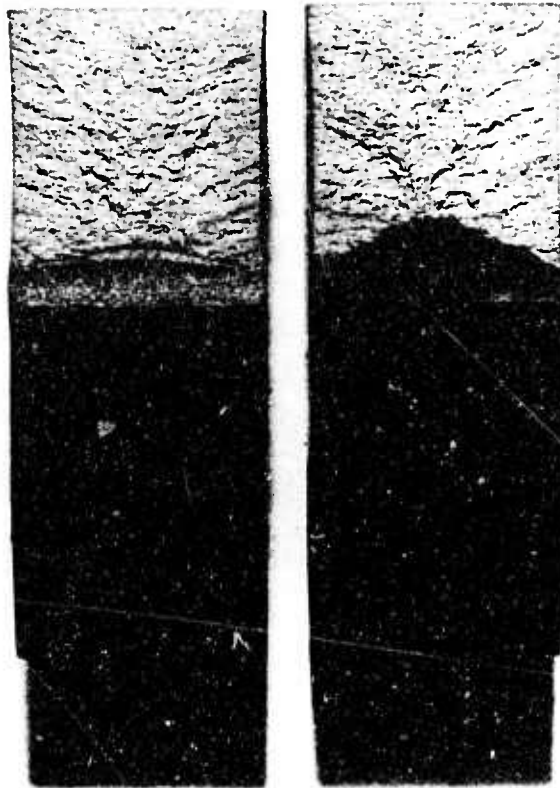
Fracture Surfaces of ASTM A-286 at 298 K
